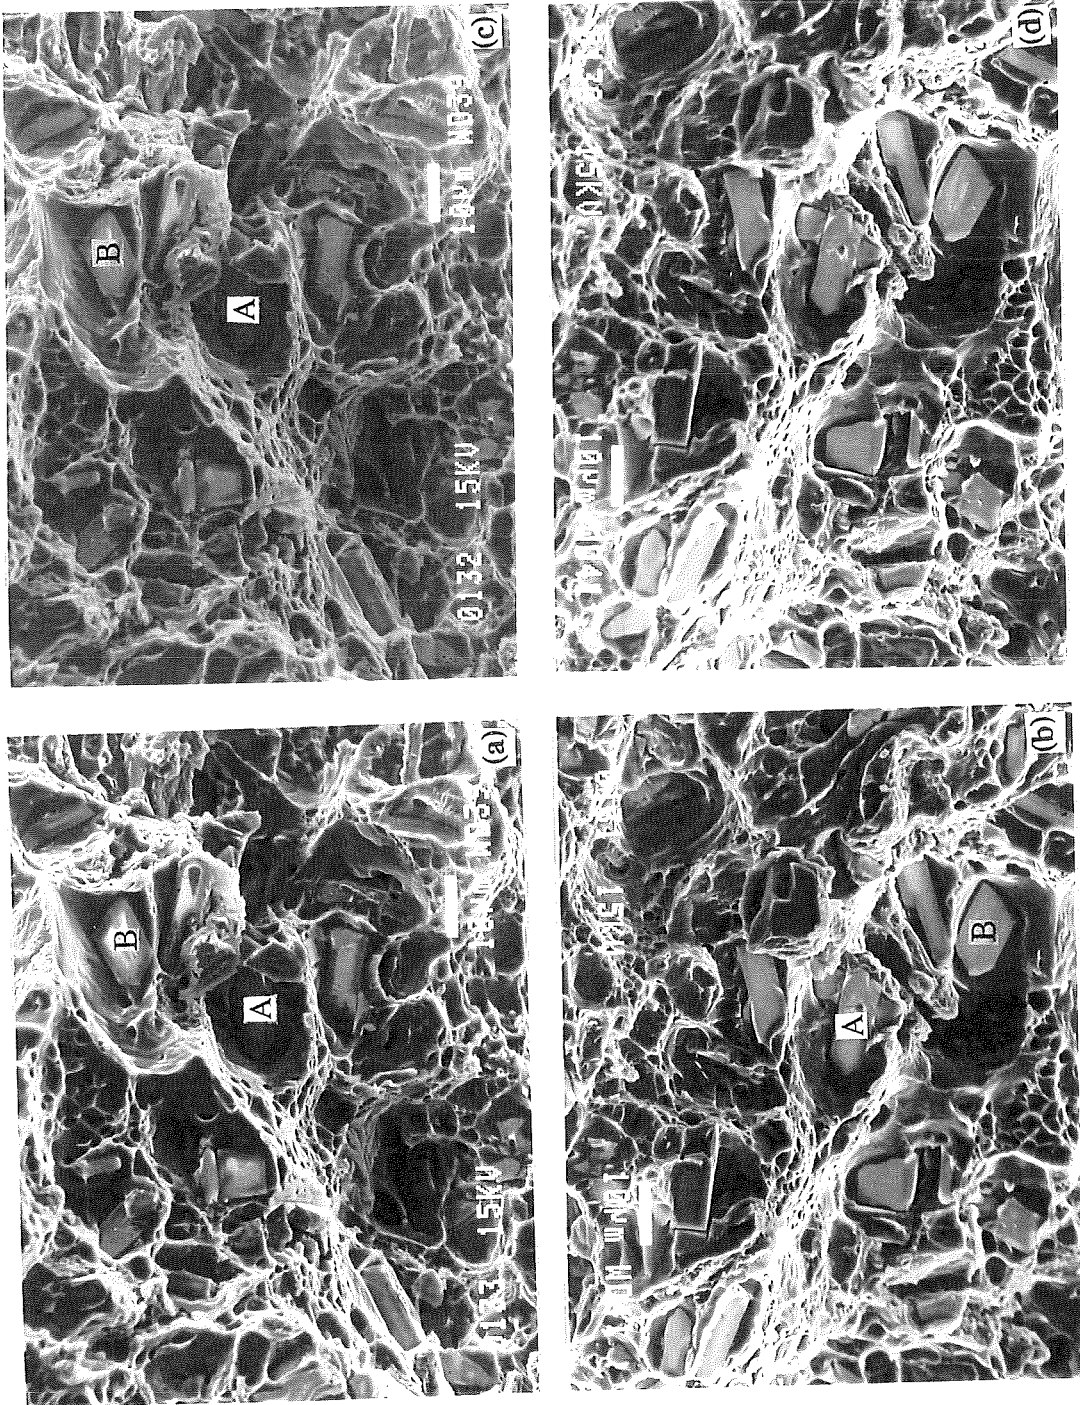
Fracture Surfaces of Extruded Composites, Matching Pairs:
